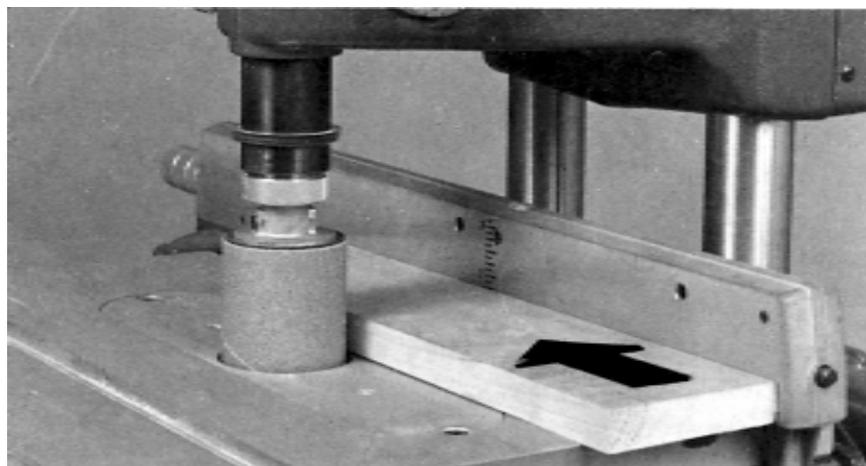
Sand straight edges as shown when you wish to sand workpieces to an exact width.
